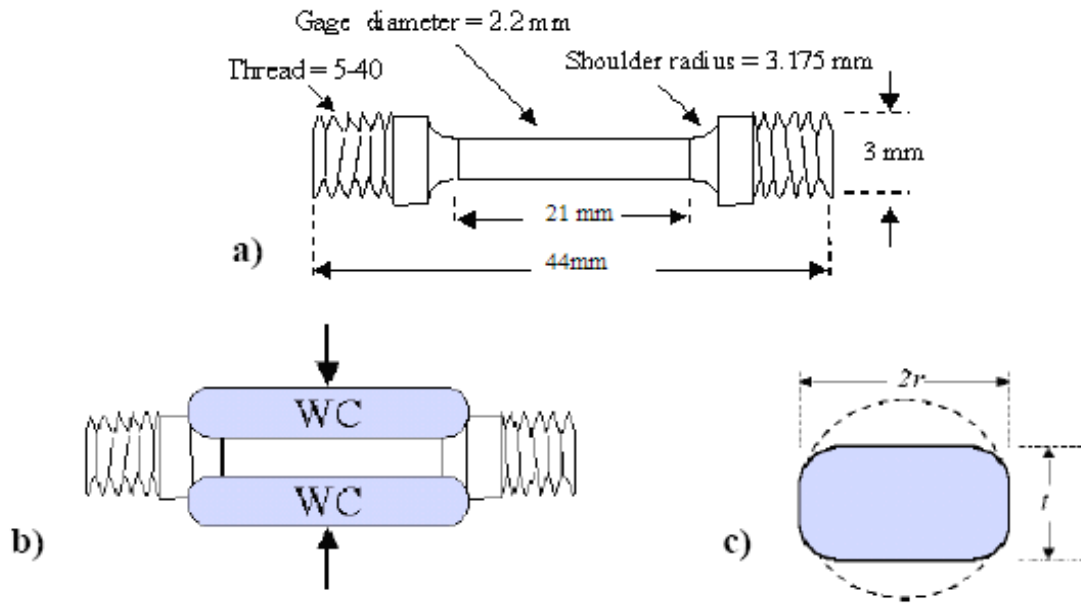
a) Dimensions of the as-received tensile specimens, b) schematic illustrating the compression technique, and c) illustration showing the cross-sectional (shaded) area.
